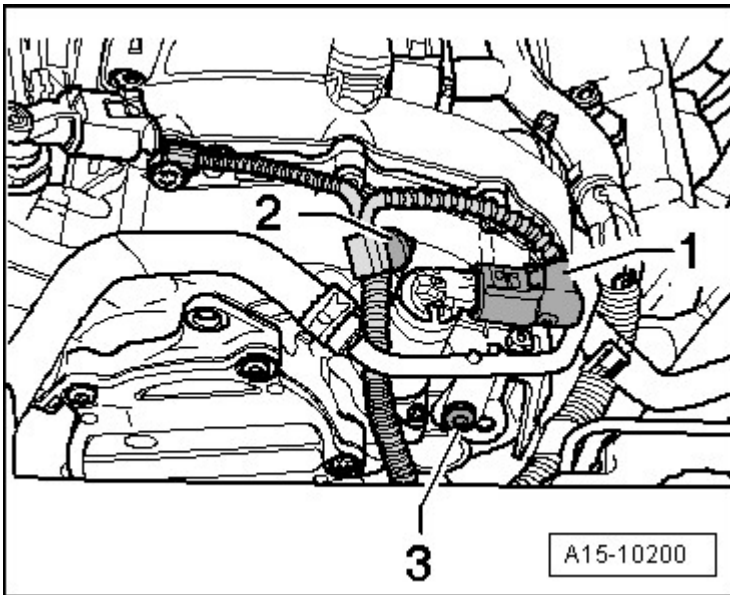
Identifying Camshaft Adjustment Valve 1 Connector, Wiring Harness & Bolts
